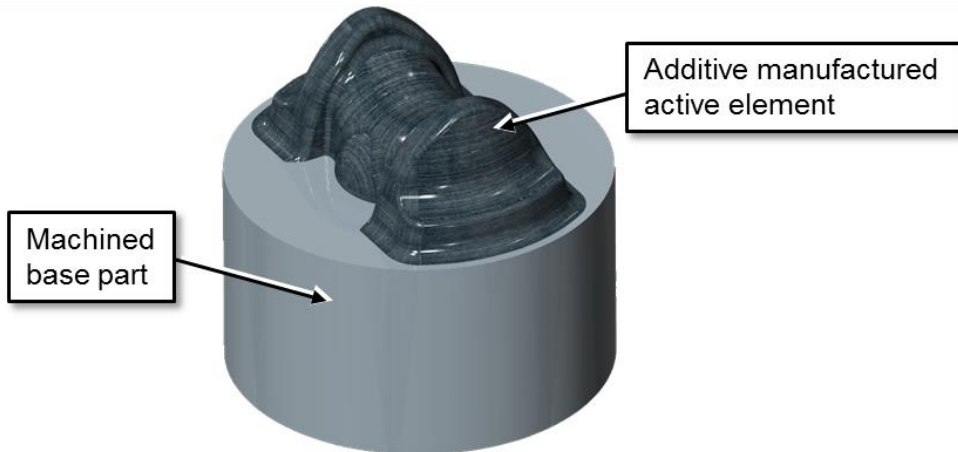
Principle of the hybrid tool with a machined base part and an active element added by additive manufacturing with LMD
